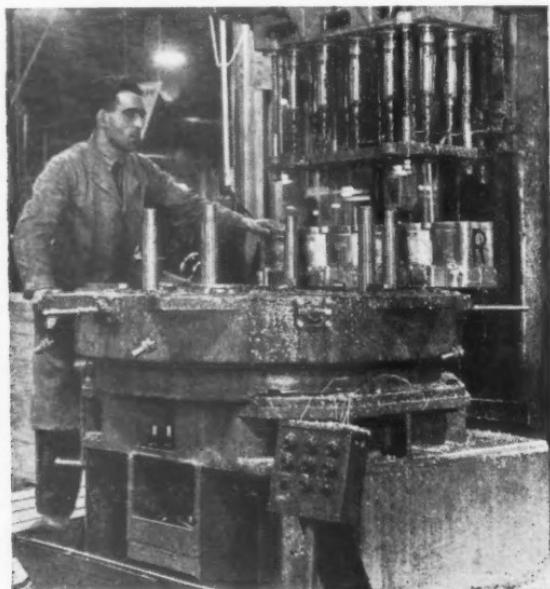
Natco 3BL Holesteel Multi Drilling Machine.
